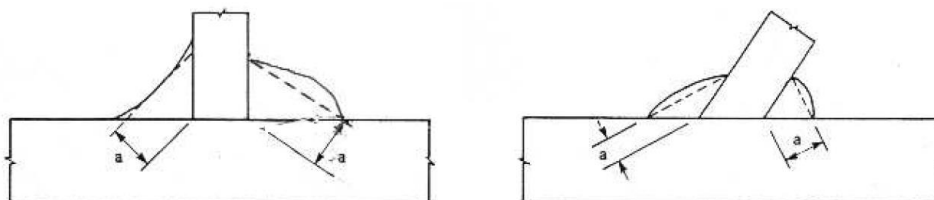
Throat thickness of a fillet weld (EC 3–Part 1-8, 2005).
